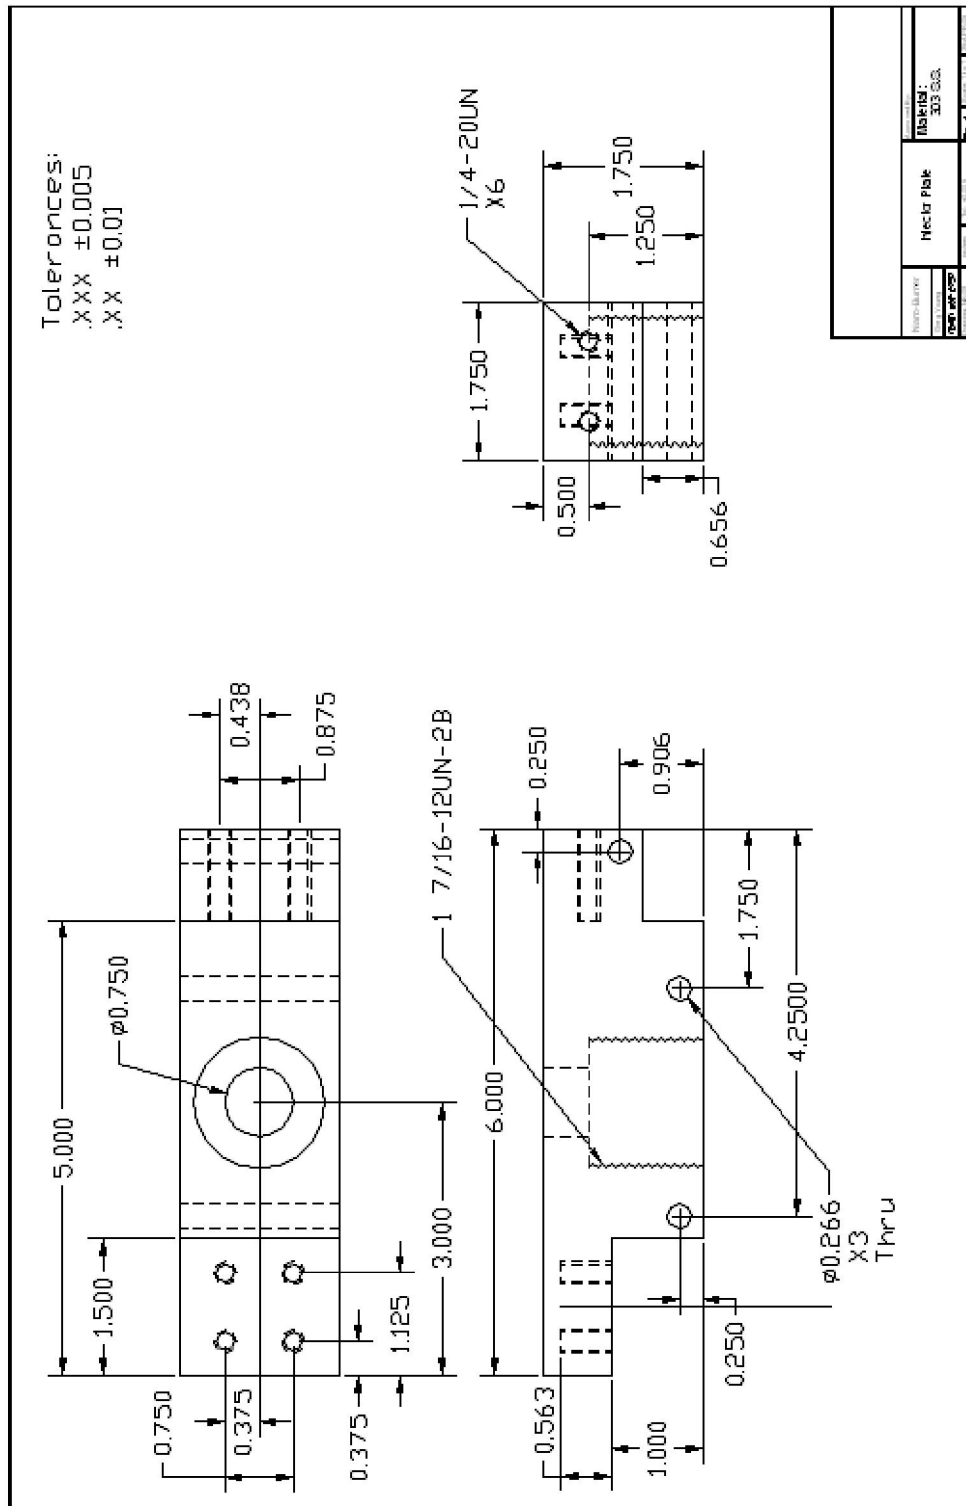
Combustor Injector Plate (Mates With Pilot Flame Combustor)
